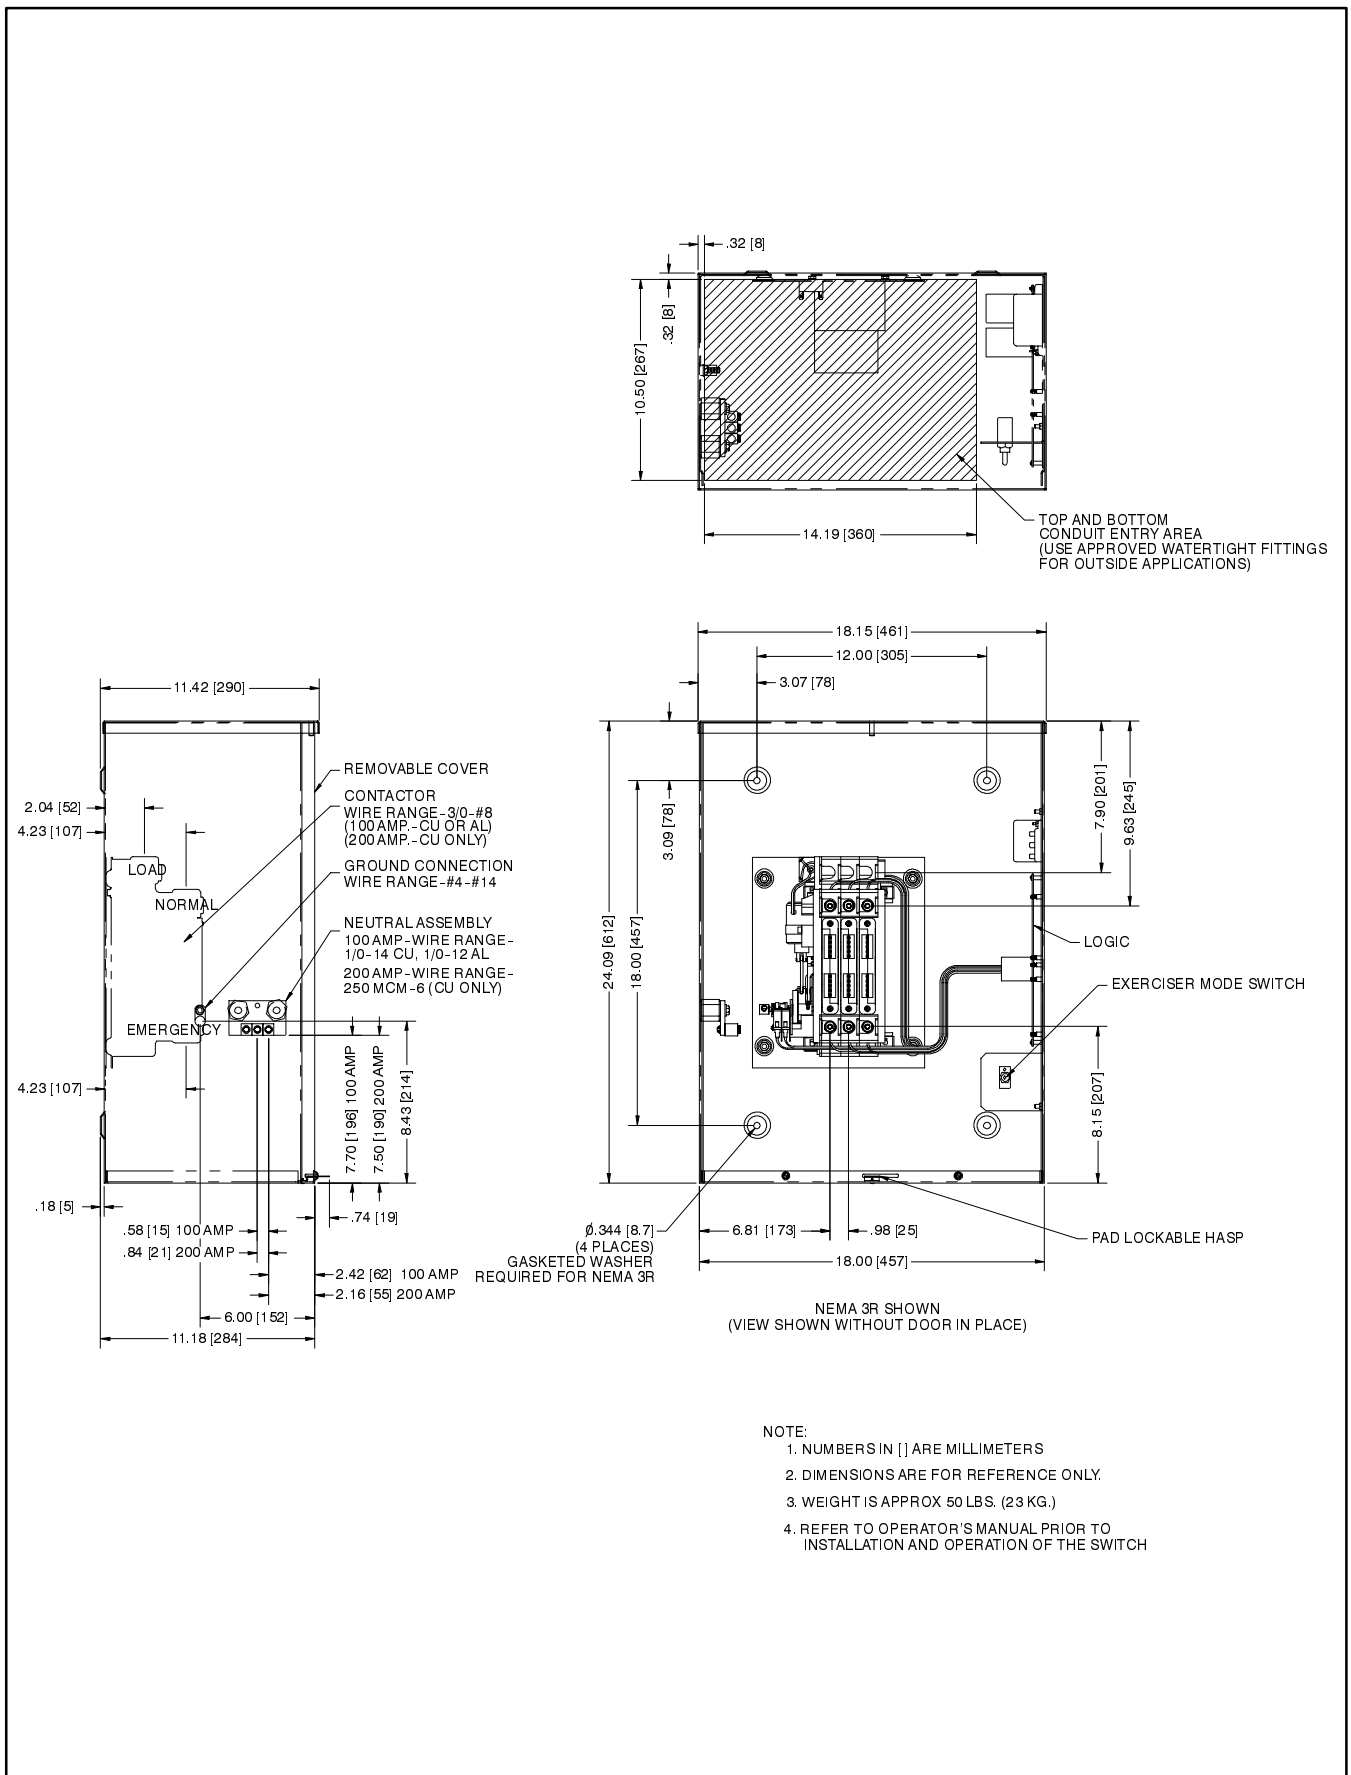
Enclosure Dimensions Drawings, NEMA 1 and 3R, 100 and 200 Amp, ADV-6428-
